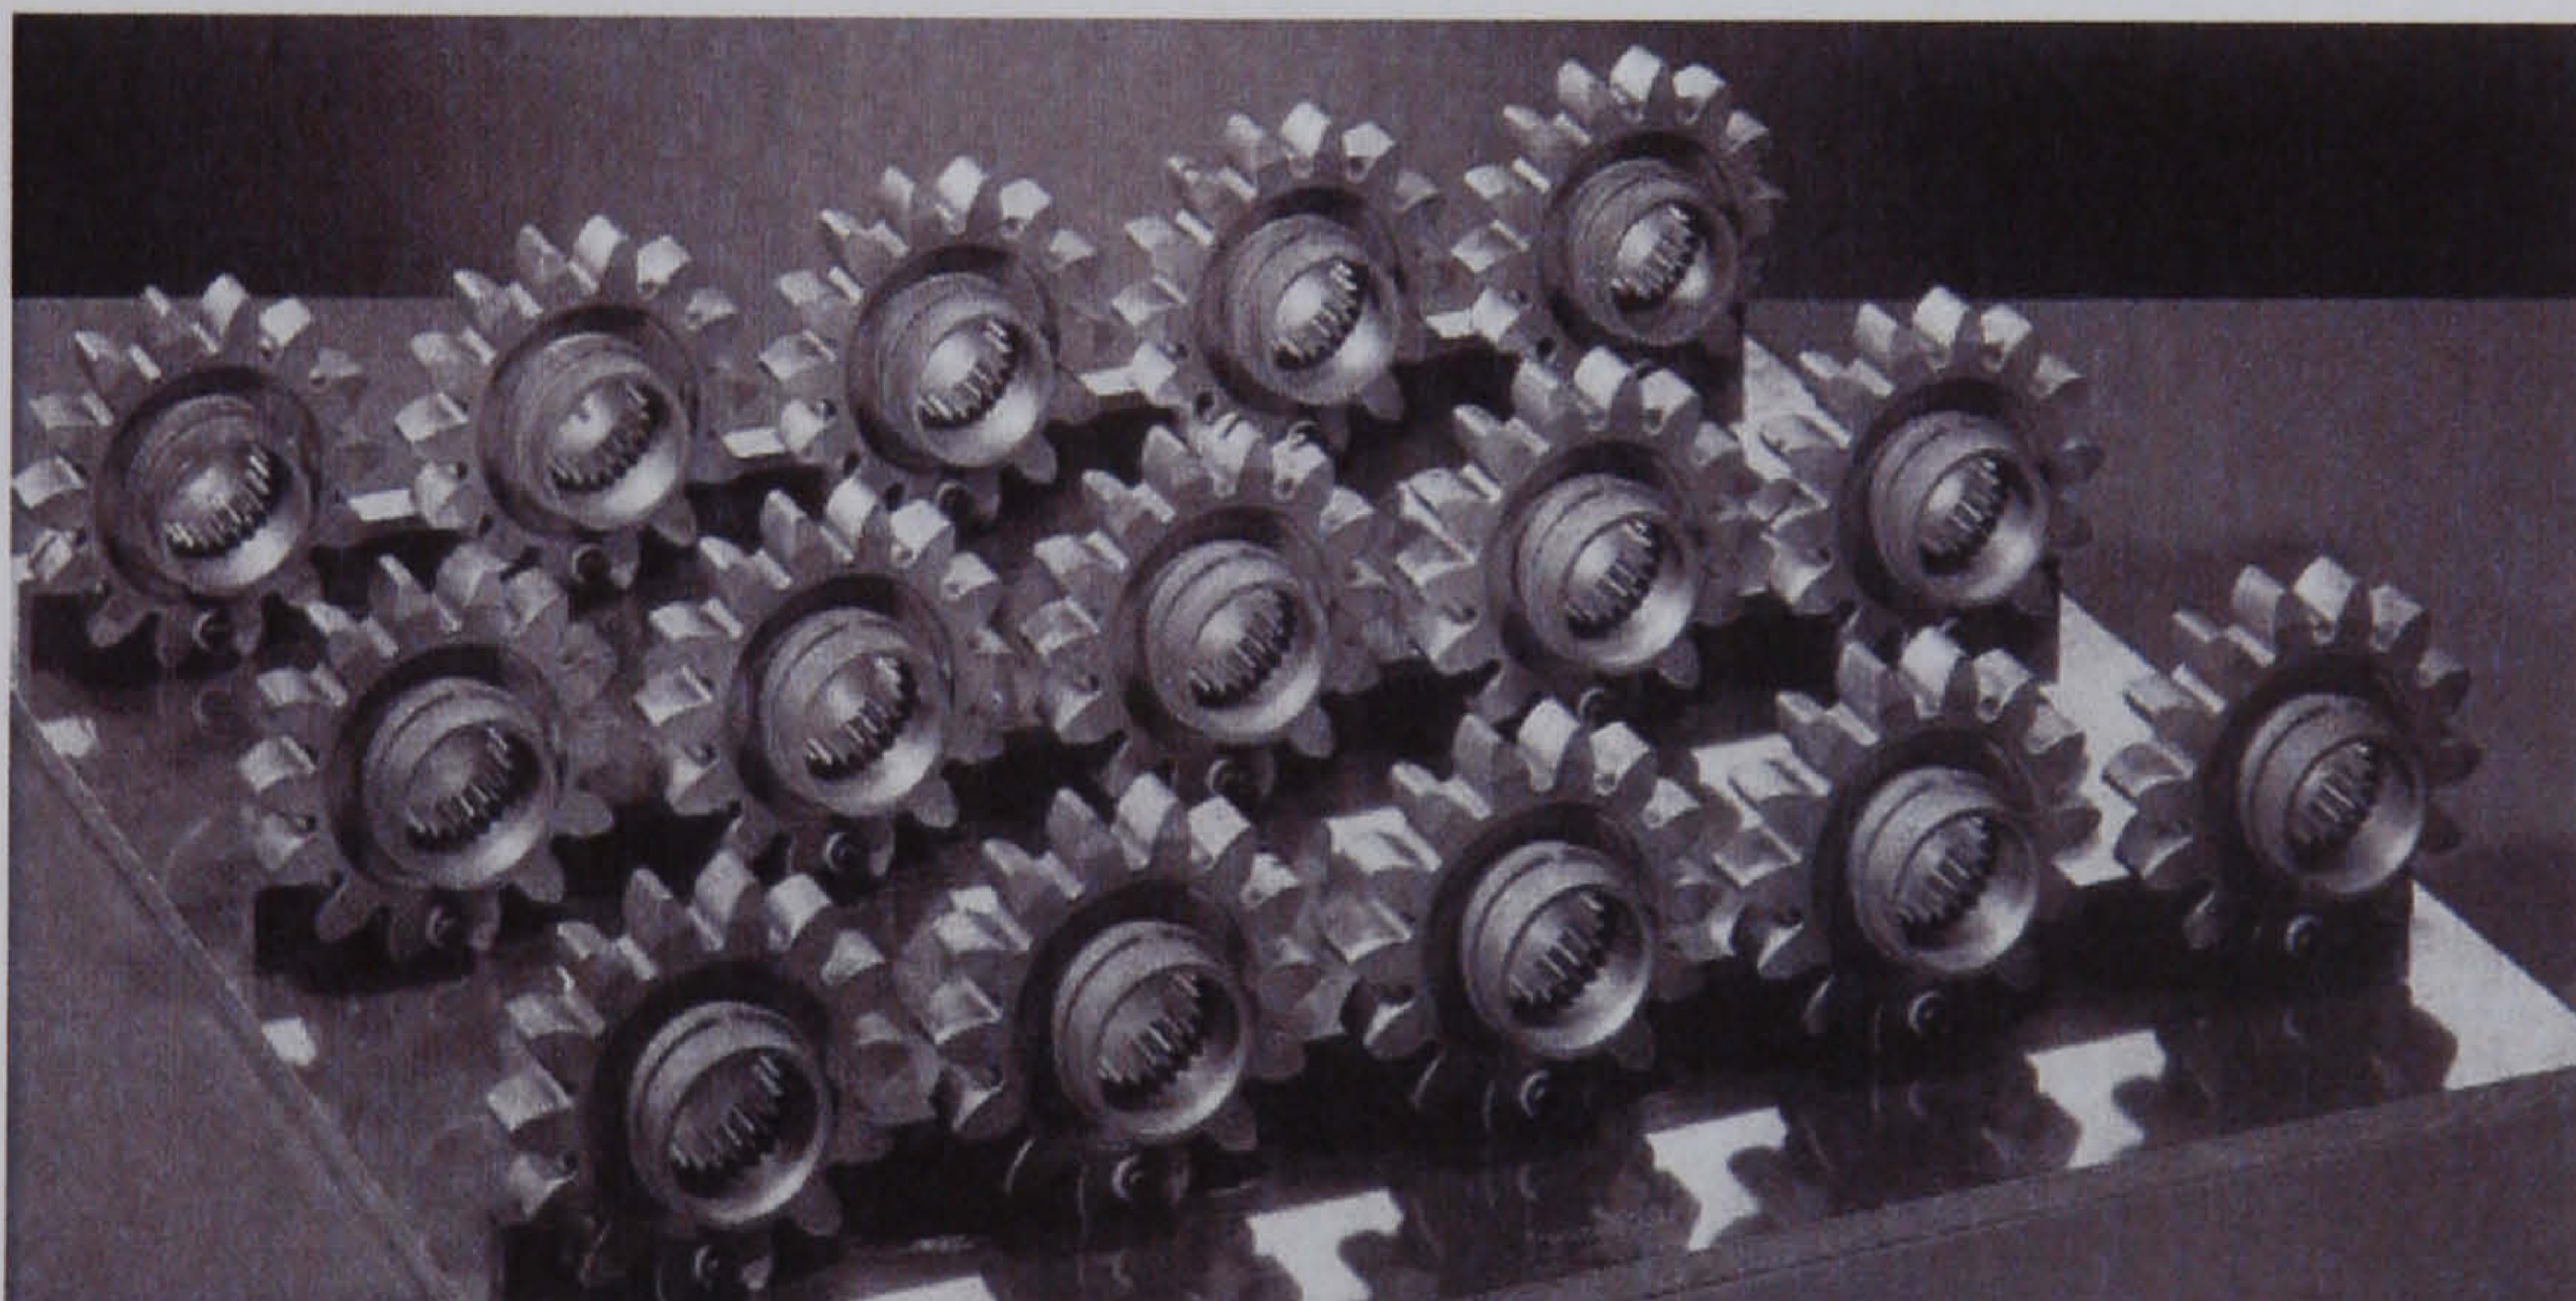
Pallet loaded gears for sample batch inspection on a CMM. It is very difficult to replicate this measurement strategy on a dedicated gear measuring instrument.
